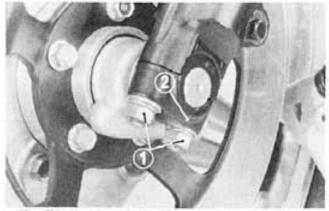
(1) Axle holder nut (2) Axle holder
